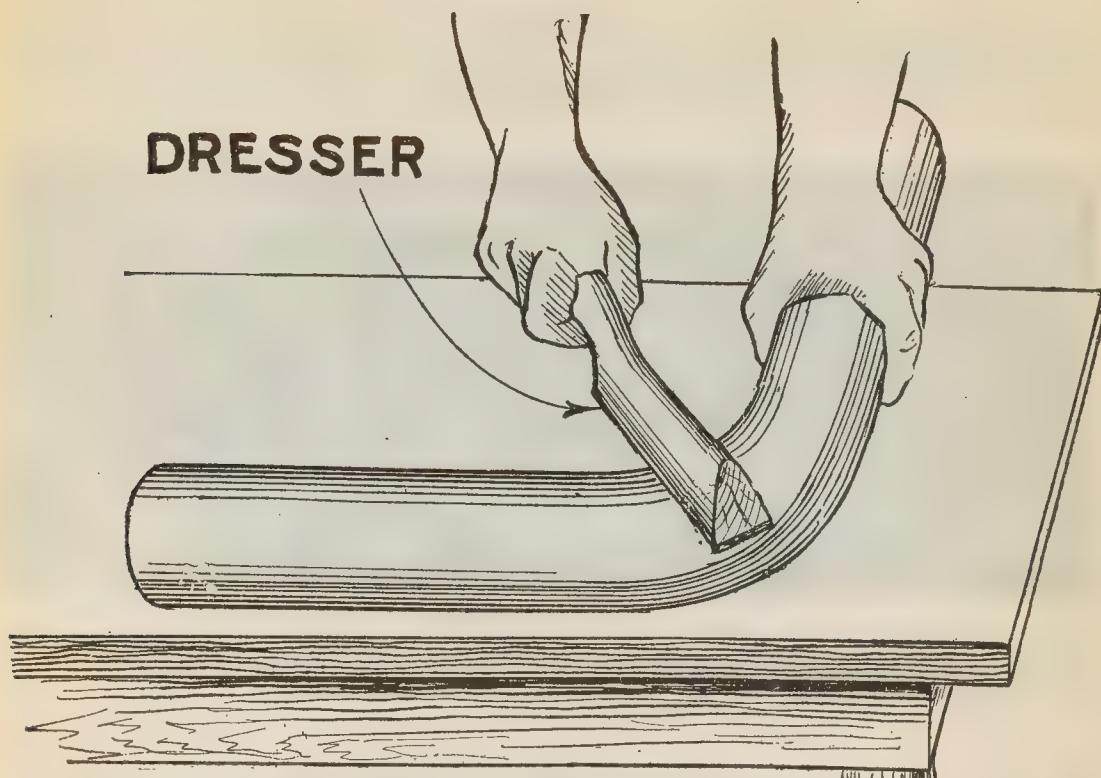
,518.—*Bending with bobbins, 4.* Application of dresser to smooth out irregularities of surface.
